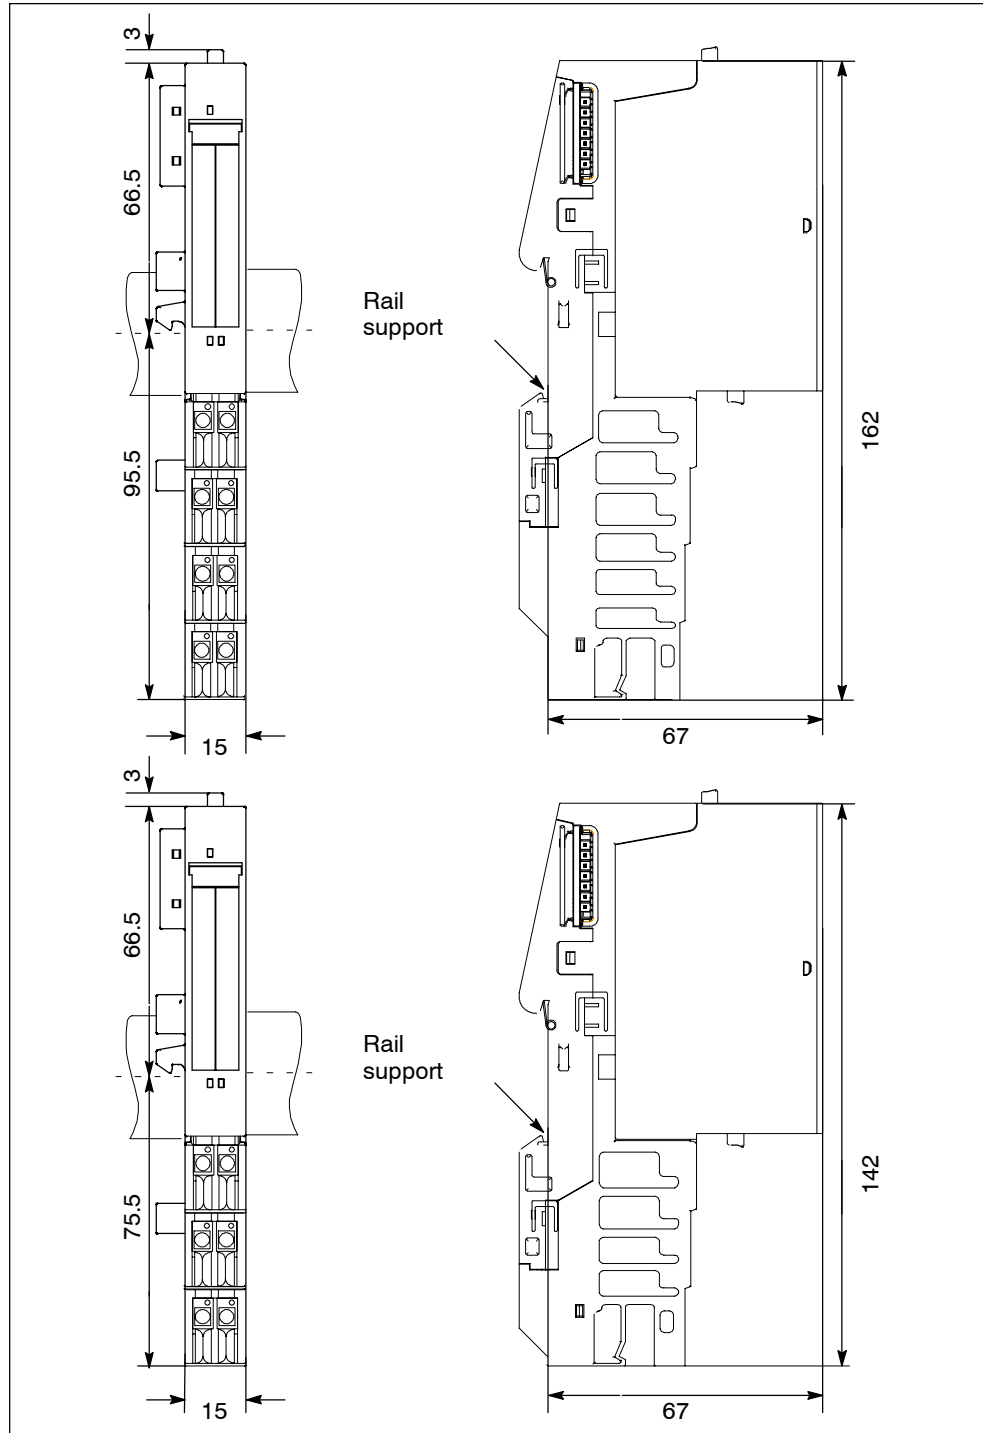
Dimensioned drawing of terminal modules (Fast Connect) with an electronic module inserted
